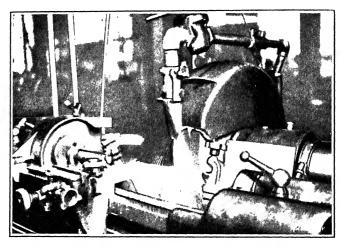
Adjustable Deflector for delivering Coolant to Grinding Wheel and Work
